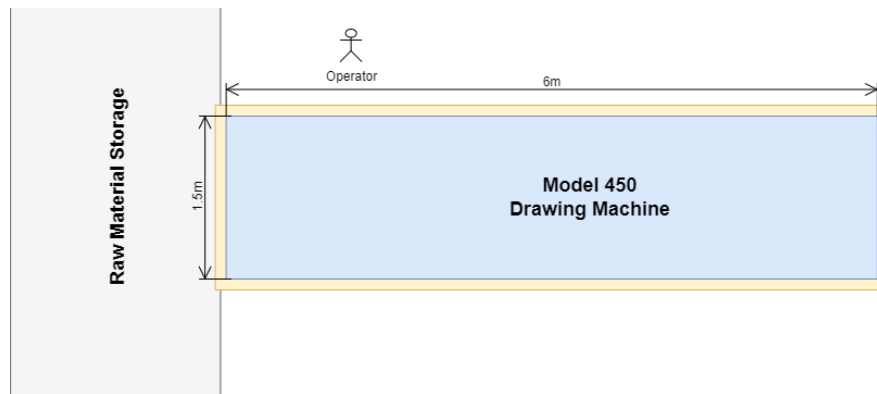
Welded Mesh and Jackal & Pig Netting layout
